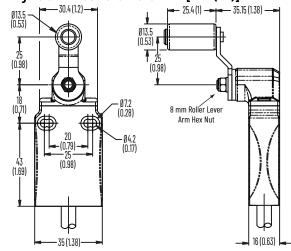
Adjustable Roller Lever Arm [mm (in.)]
